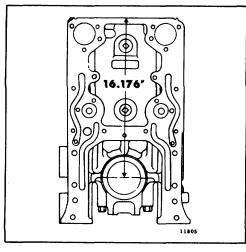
Minimum Distance from Center Line of Crankshaft to Top of Cylinder Block
